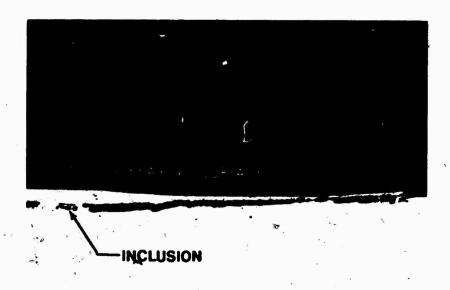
Section Through Crack in Bearing Race (P/N 114DS244-13) (Magnification 100X).
